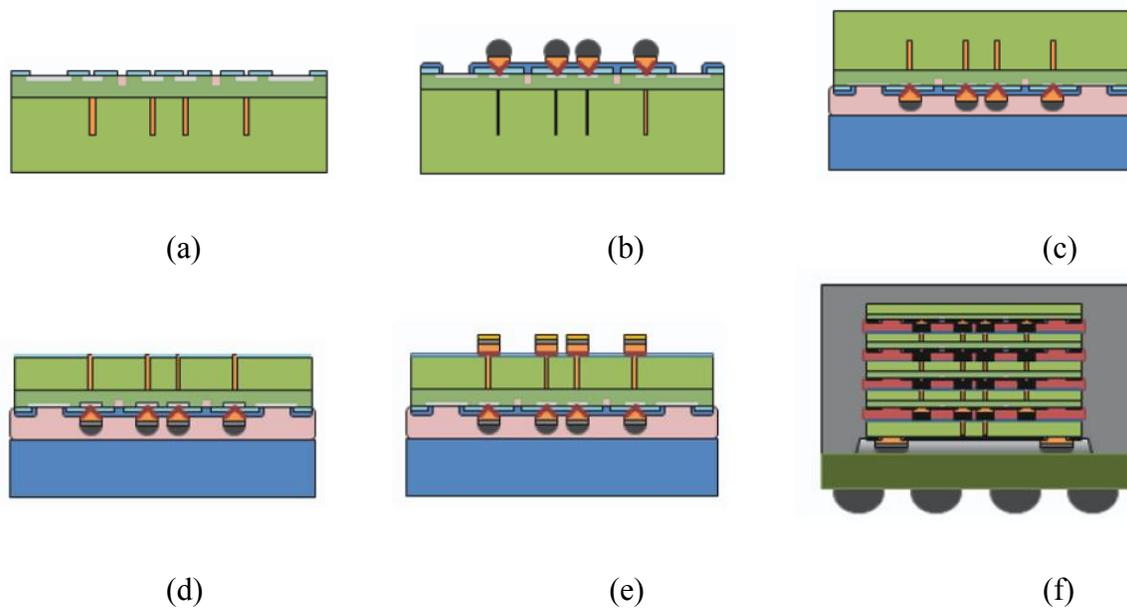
Fabrication of a 3D die-stack structure using the via-middle scheme. (a) BEOL metallization, (b) front side bumping and solder reflow, (c) mounting to a temporary carrier wafer, (d) wafer thinning and TSV reveal, (e) back side bumping, (f) die stacking by thermo-compression bonding and encapsulation by EMC [27].
